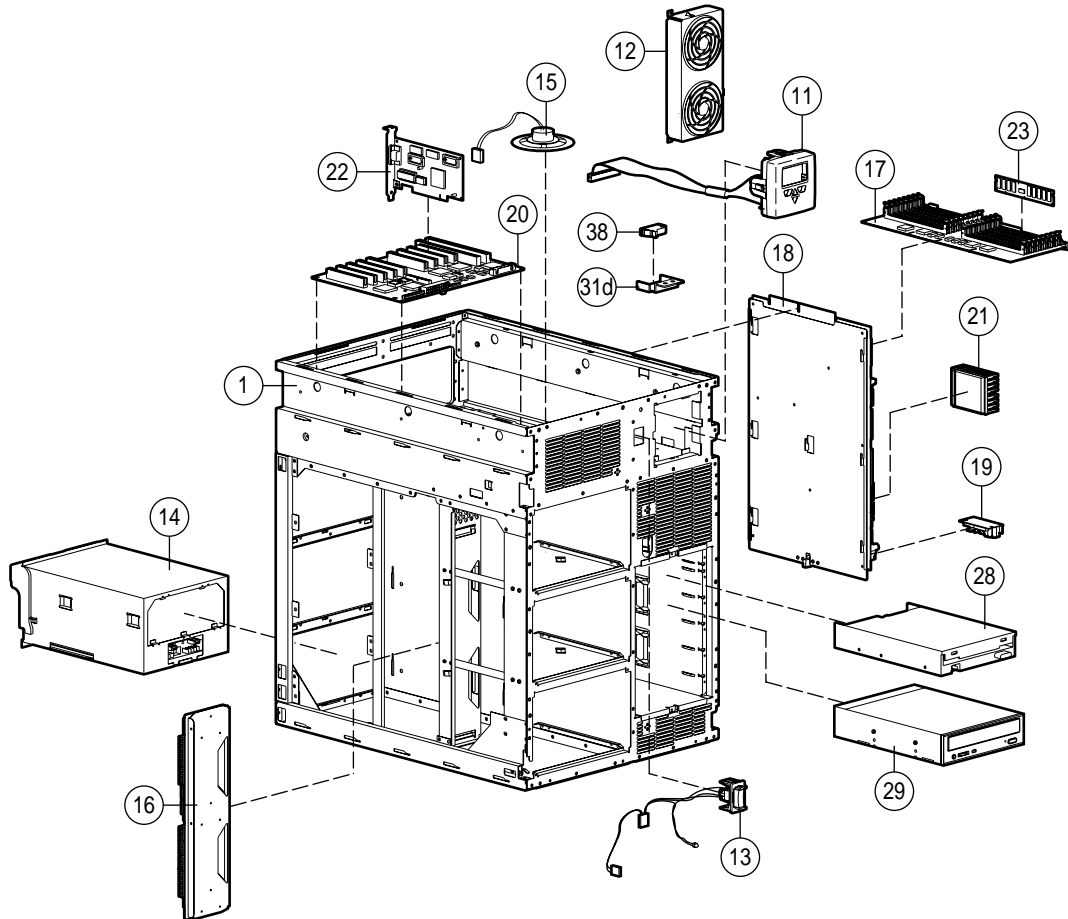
Exploded View of the Compaq ProLiant 6000 Server System Components
